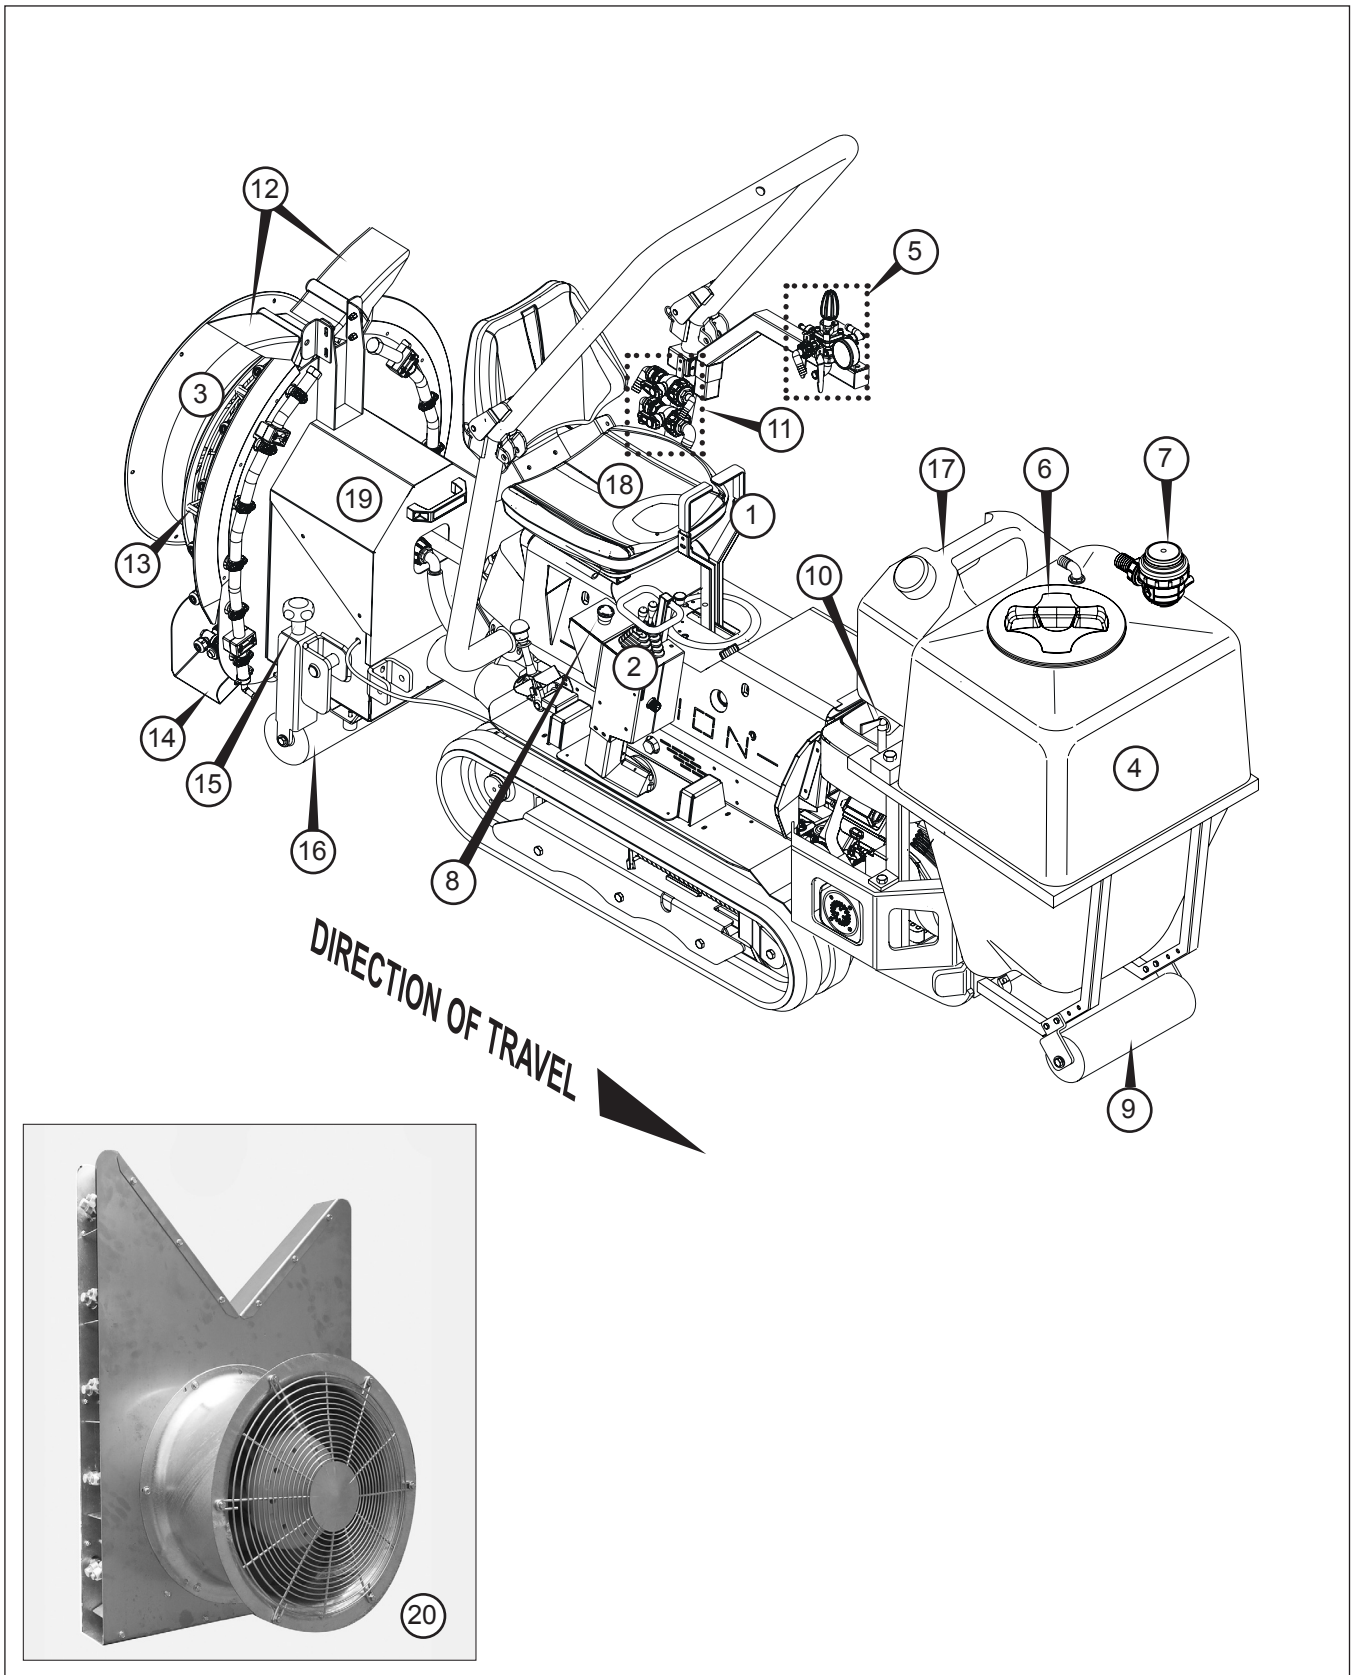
Atomizer group installed on Vision multifunction machine - Main components.
